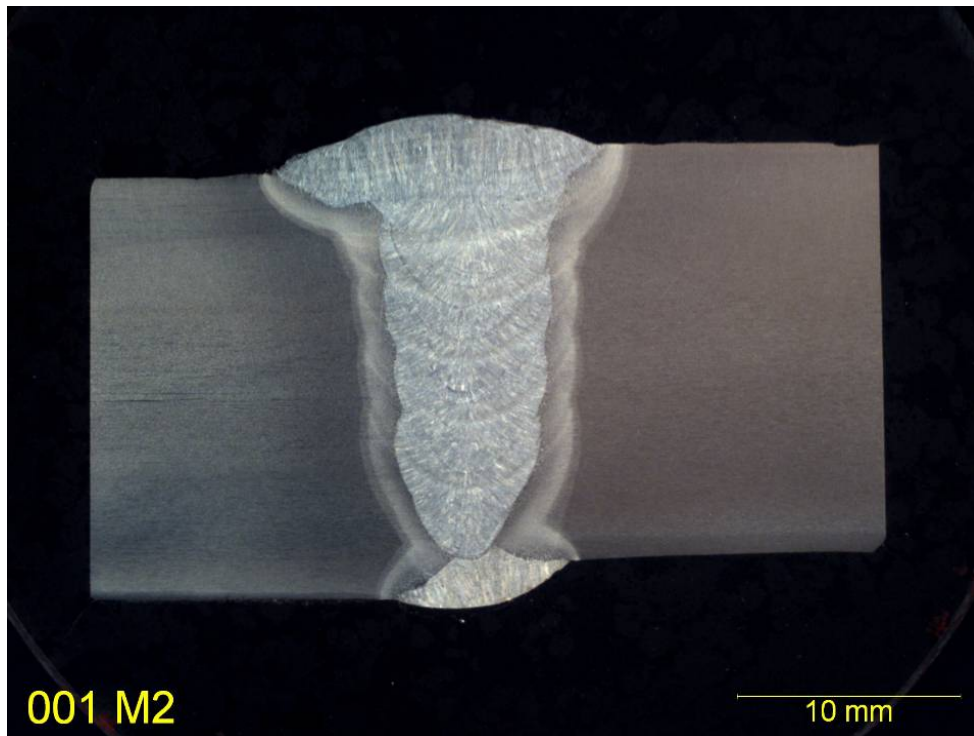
Photo-macrograph Showing Cross-section of Weld A1
